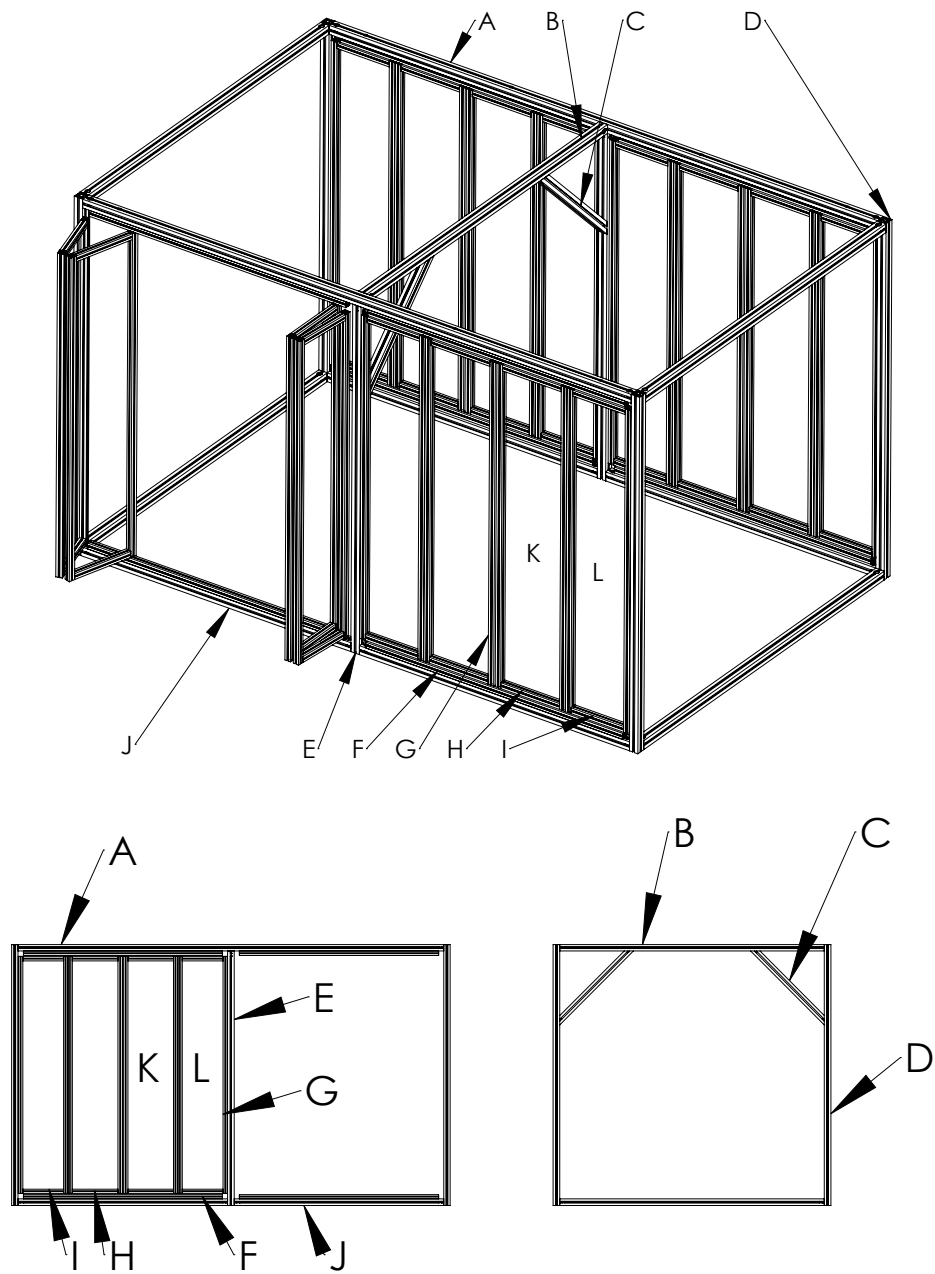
Experiment enclosure. See Table D.1 for detailed part list. For clarity, only 1 out of the 4 bifold door sets is shown in the lower drawing.
